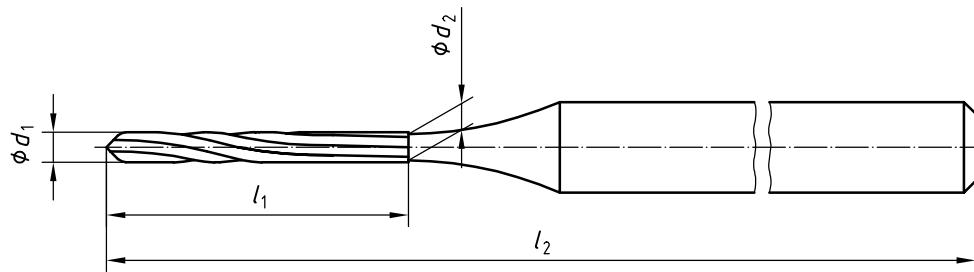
Torpedo, cylindrical, head length 8 mm, carbide finishing burs
